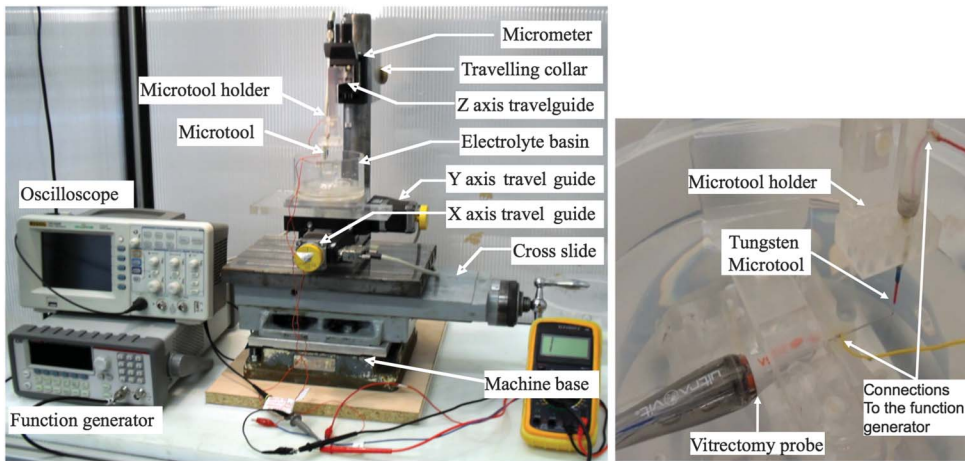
Electrochemical micro-machining workcell and detail of the machining tool-workpiece.
